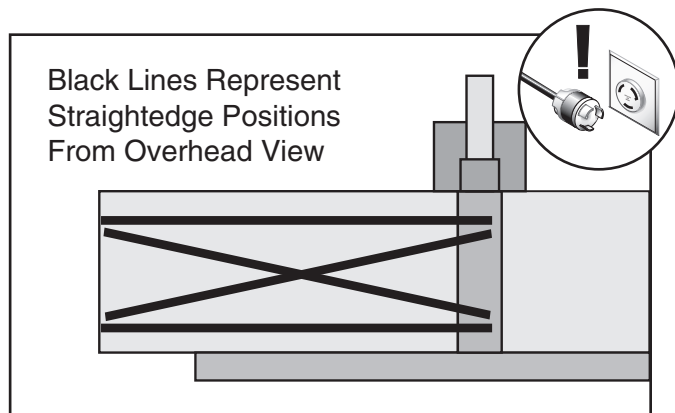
Straightedge positions for verifying if outfeed table is parallel with cutterhead.
